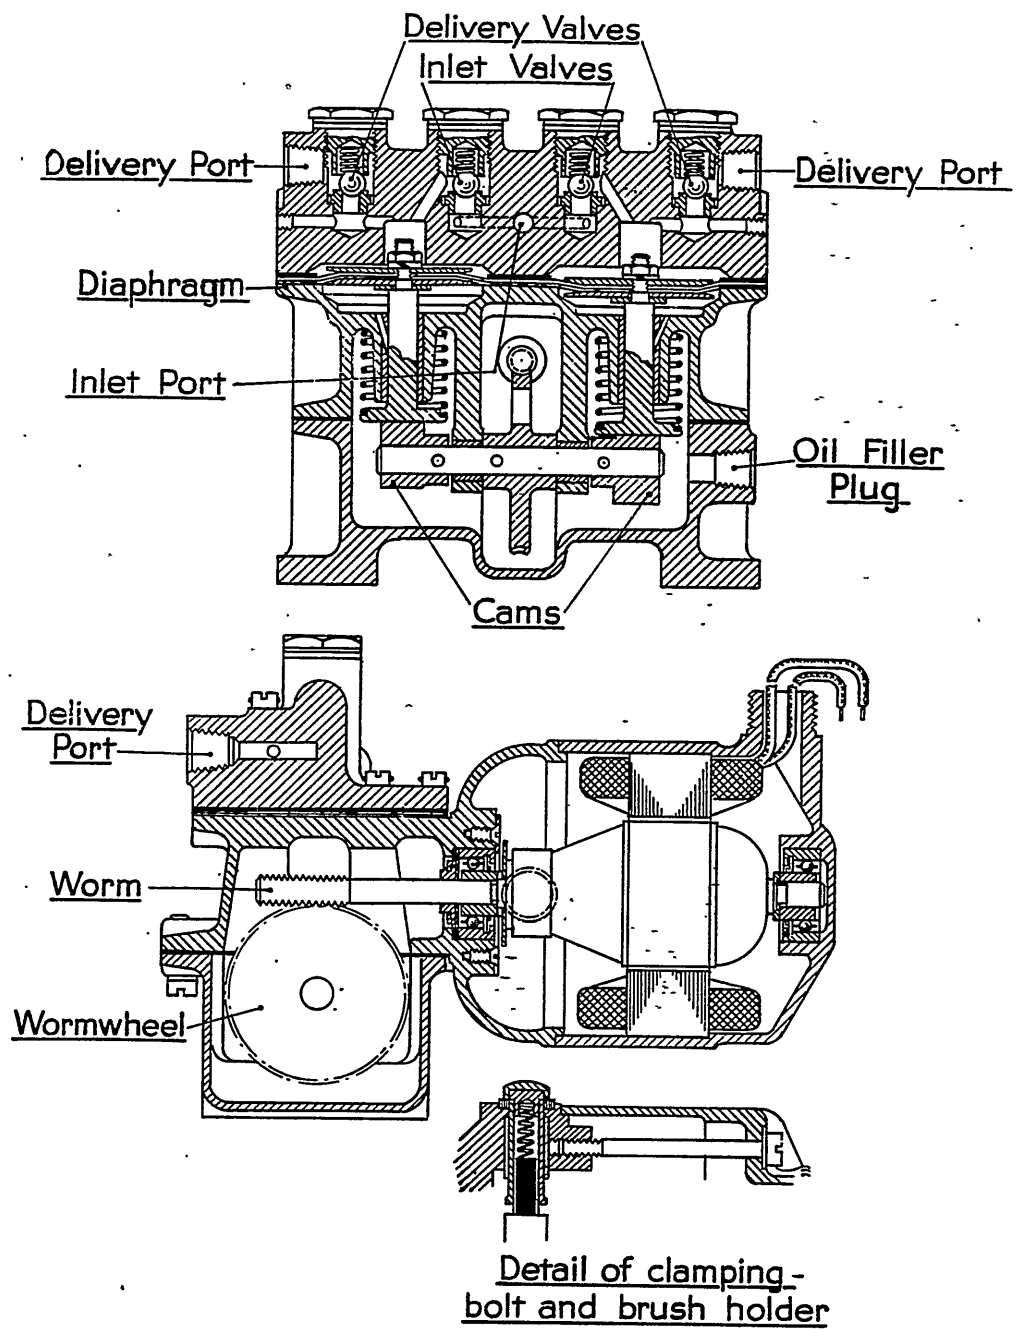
Propeller de-icing fluid pump, diaphragm type
